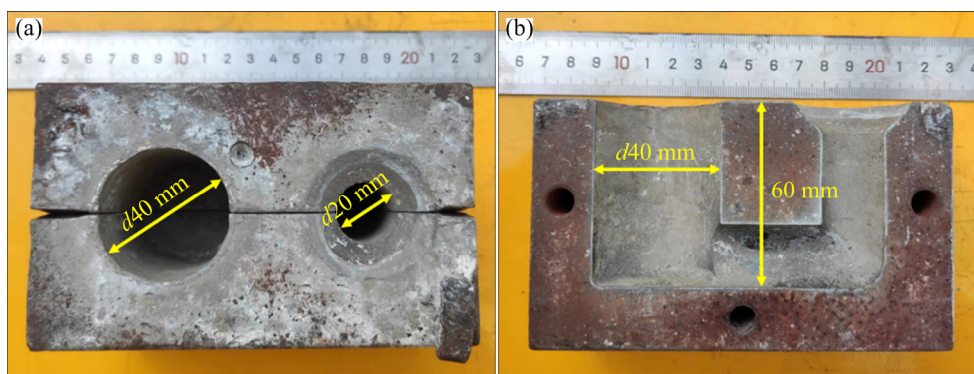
Casting mold (a) and cross-section of casting mold (b)
